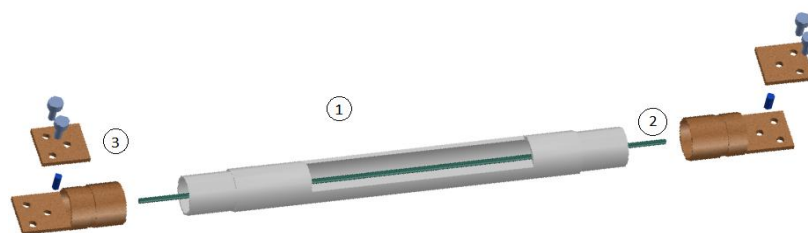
Vibrating-wire sensor: (1) flow tube; (2) tungsten wire; (3) support terminal, clamping plate, alignment pin, and M2 screws.
